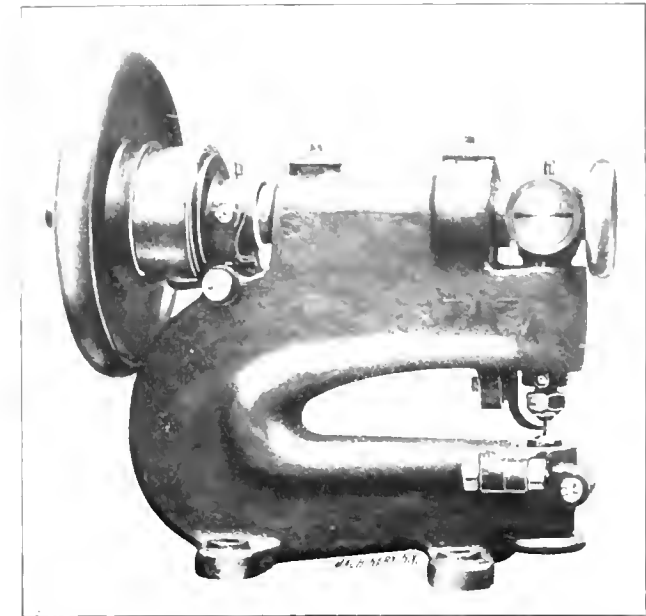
Machine for Rapidly Blanking out Special Irregular Shapes in Sheet Metal. Size from Punch to Throat, 12 Inches.
